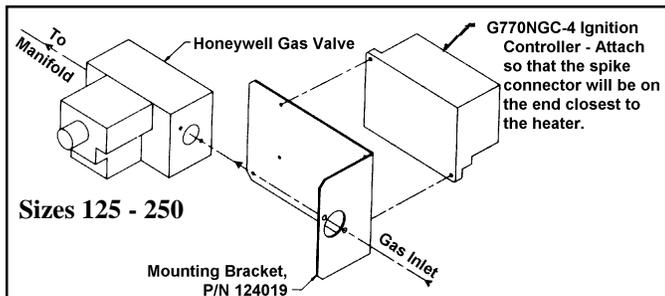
Assemble Ignition Controller and Bracket; attach to the already-installed Honeywell Gas Valve
